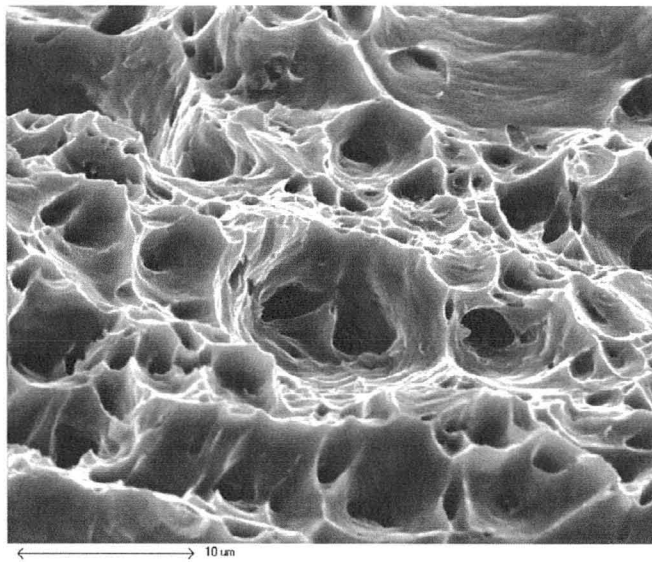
Fracture Surface for 0.5at%Mg sample, 78K test, 3100x magnification
